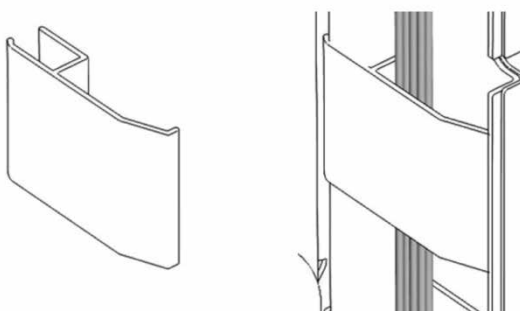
Tubing bracket (left), tubing bracket installed (right)
